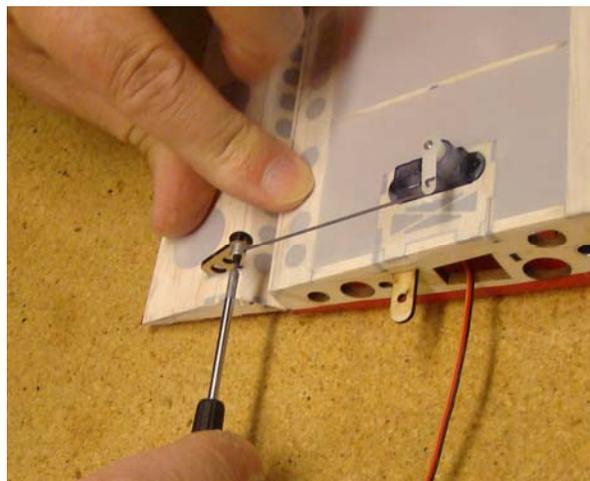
With the wing flat on table tighten the quick link screw but be careful not to over tighten it. It is aluminum and you could strip the quick link. Repeat on other wing.
